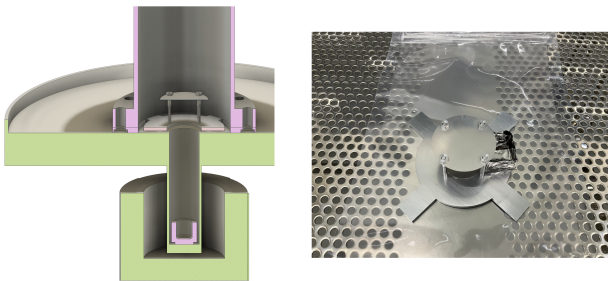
Cross-section of bottom of coating furnace and shading (left), and shading jig for fourth coating (right).
